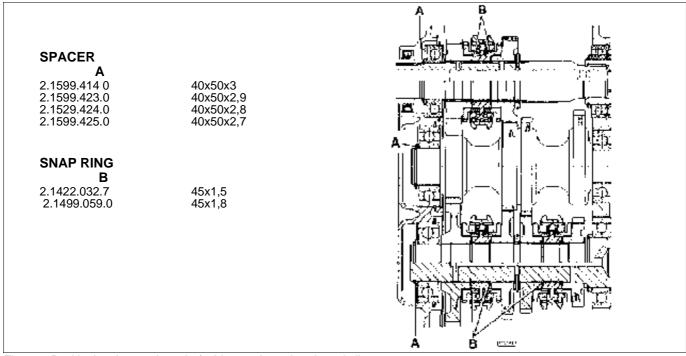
Positioning the gearbox shaft shims and synchroniser circlips.
